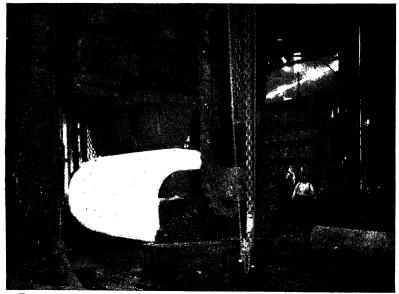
Forging oil-refinery reaction chamber. The large hydraulic pistons are just emerging into view in the upper part of the picture. The large chain rotates the mandrel and the work. A preheating furnace is visible in the right background. (Bethlehem Steel Co.)
